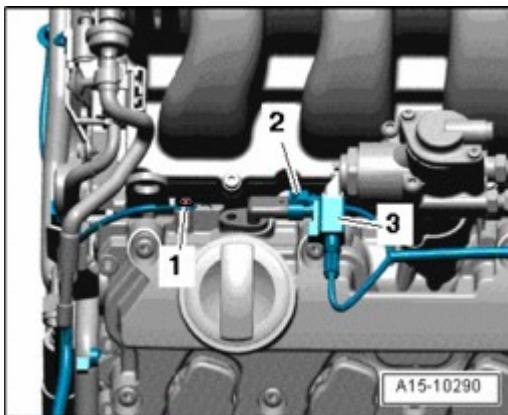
Removing Ground Wire, Electrical Connectors & High-Pressure Pump
